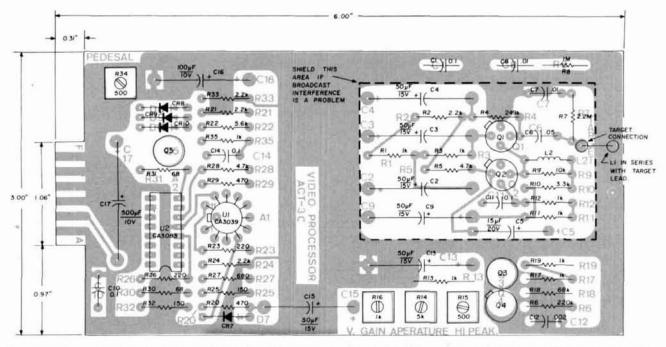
The area enclosed with a dotted line on the video processor board should be shielded if broadcast interference is a problem. L1 is not mounted on the board but runs directly between the board and the Vidicon. All other components are mounted as shown in this diagram.
